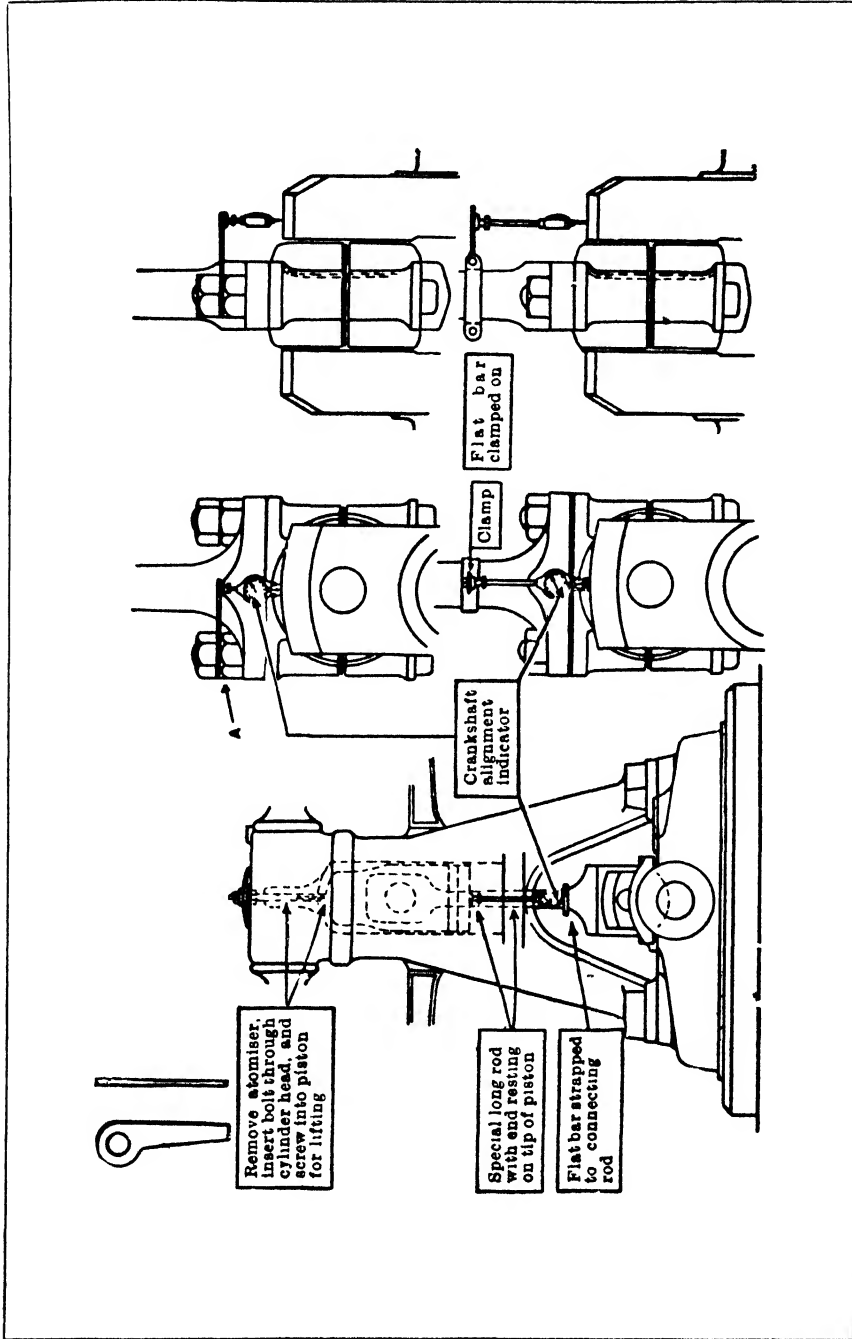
METHOD OF TESTING BEARING CLEARANCES WITH DIAL INDICATOR (Ruston & Hornsby, Ltd.)
